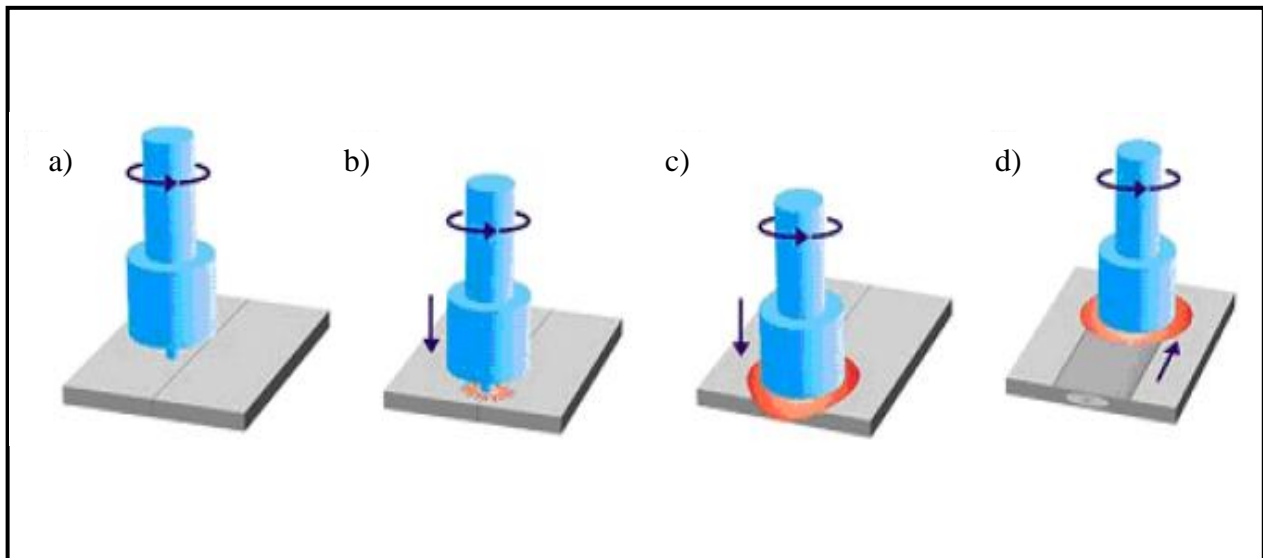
Schematic representation of FSW process: a) Rotating tool before plunging, b) Plunging stage, c) Tool shoulder touches the work piece surface producing frictional heat, d) Rotating tool traverses along the work piece
